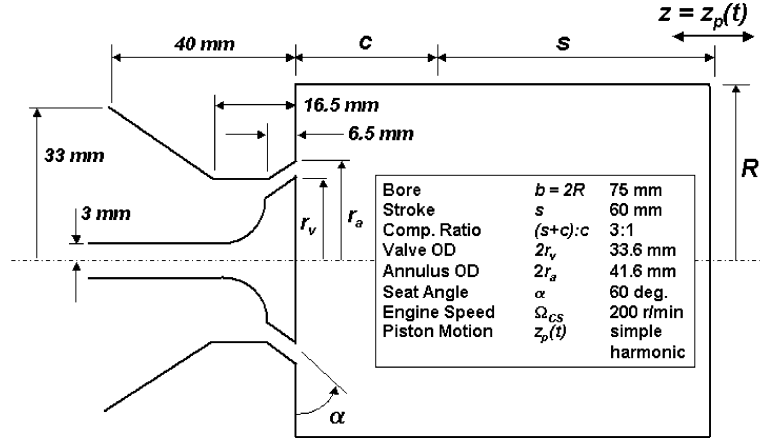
The piston-cylinder assembly of Morse et al. [44].
